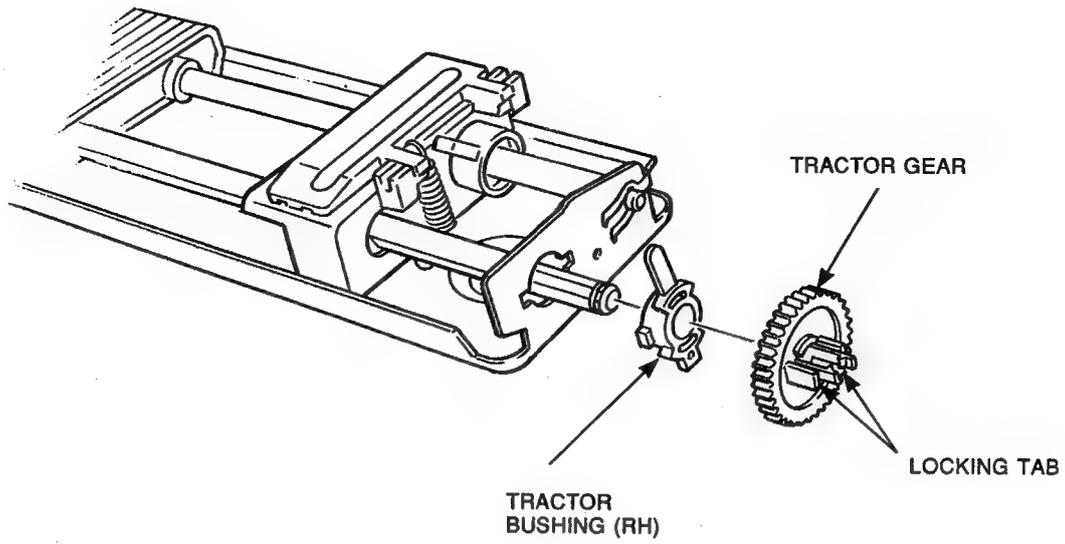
Tractor Gear and Tractor Bushing (RH)
